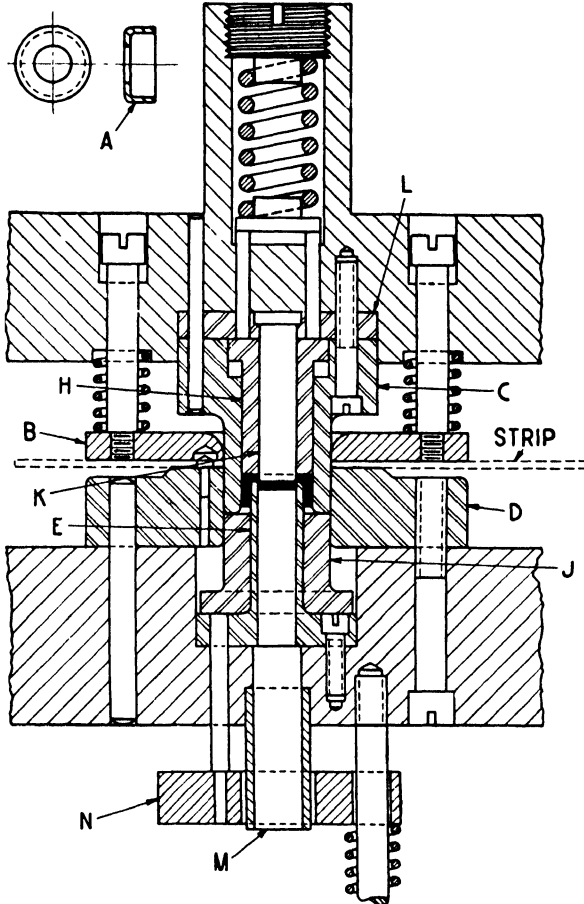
Design of a compound blanking, drawing, and piercing punch and die for producing large quantities of the shell shown at A.
